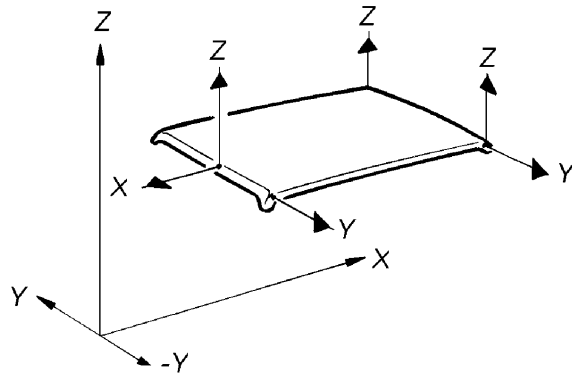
The datum system of an automotive roof. The black flags indicate the datum points and the associated letter x , y or z indicate the guiding direction. The part is seen to have three datum points that guide the workpiece in the z -direction, two in y and one in the x -direction.
